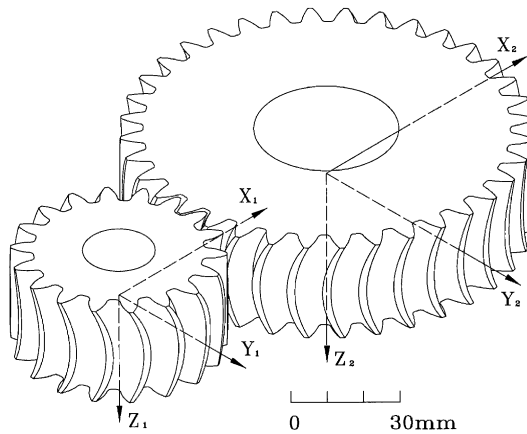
Cylindrical gears with curvilinear shaped teeth.
